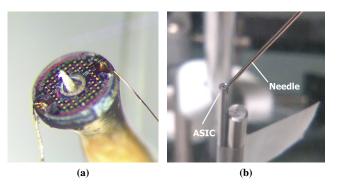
(a) Lasercut ASIC being mounted to the coaxial cable and (b) electrical testing using a needle to probe.
